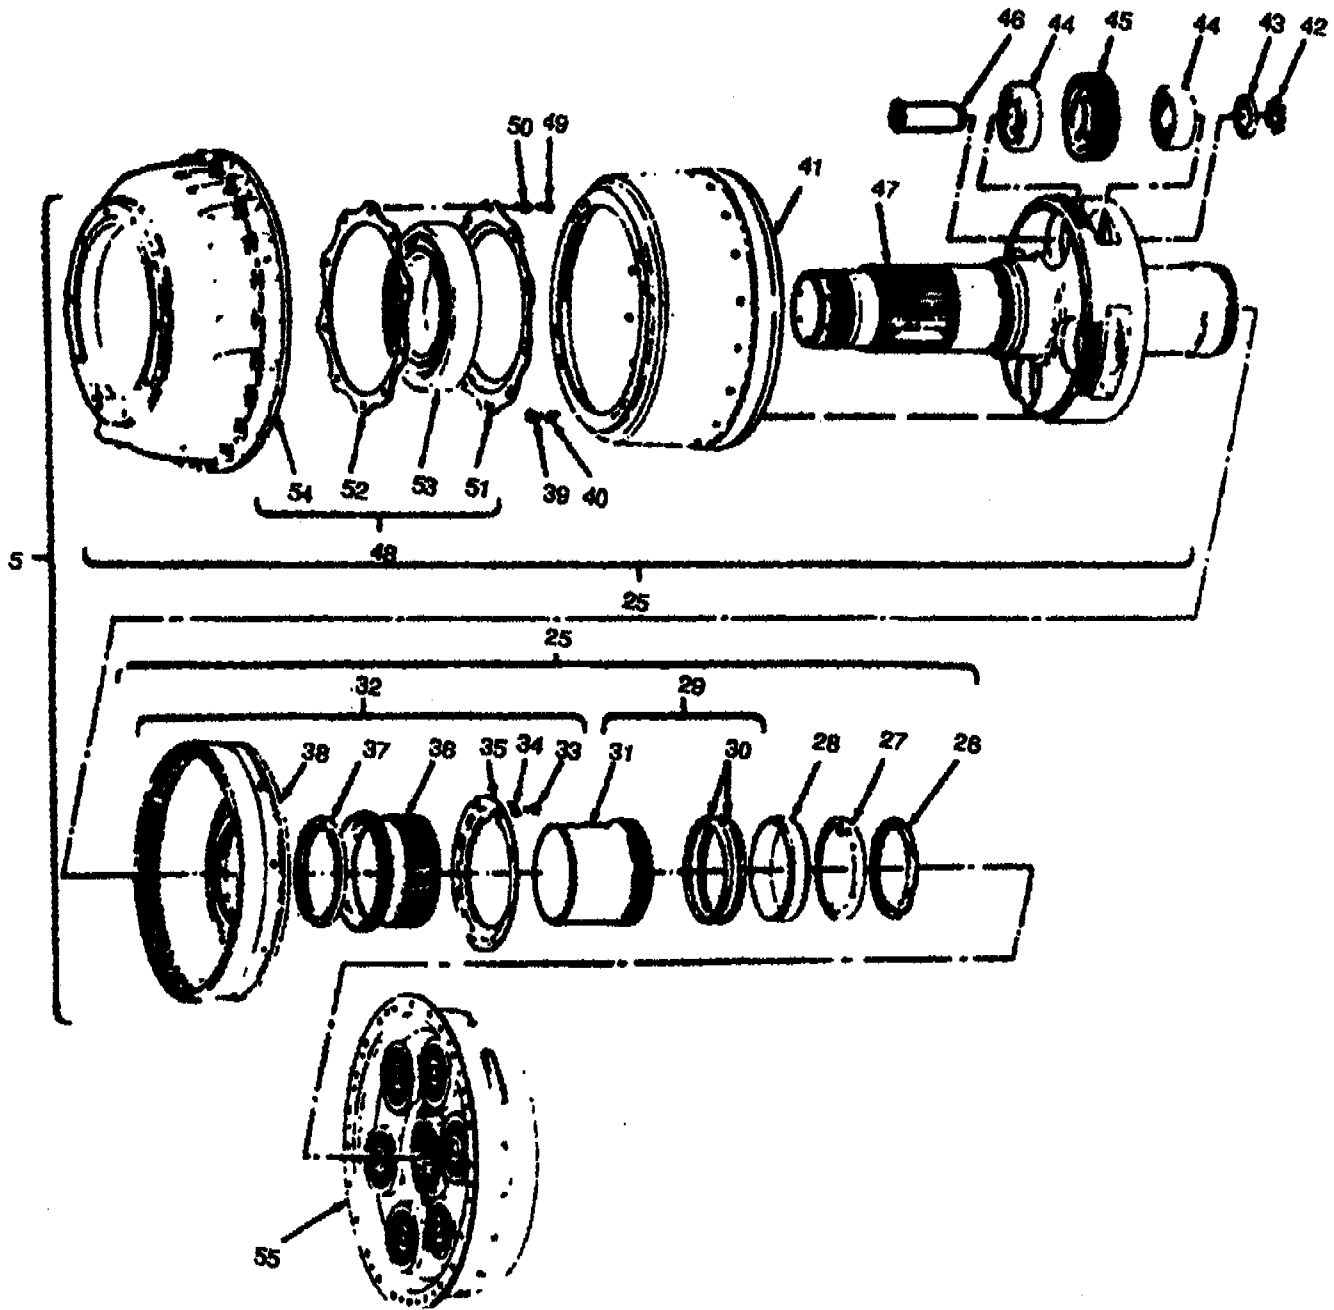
Primary Reduction Gear Assembly (T53-L-701, -701A) (Sheet 2 of 2).
